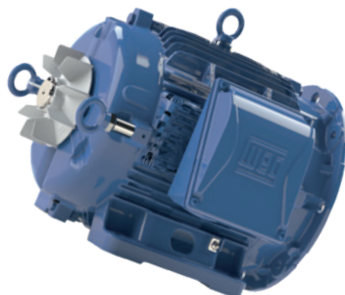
Eyebolts with extension fixed at NDE side to place the motor in vertical position, with the shaft end down (V5/V35)
